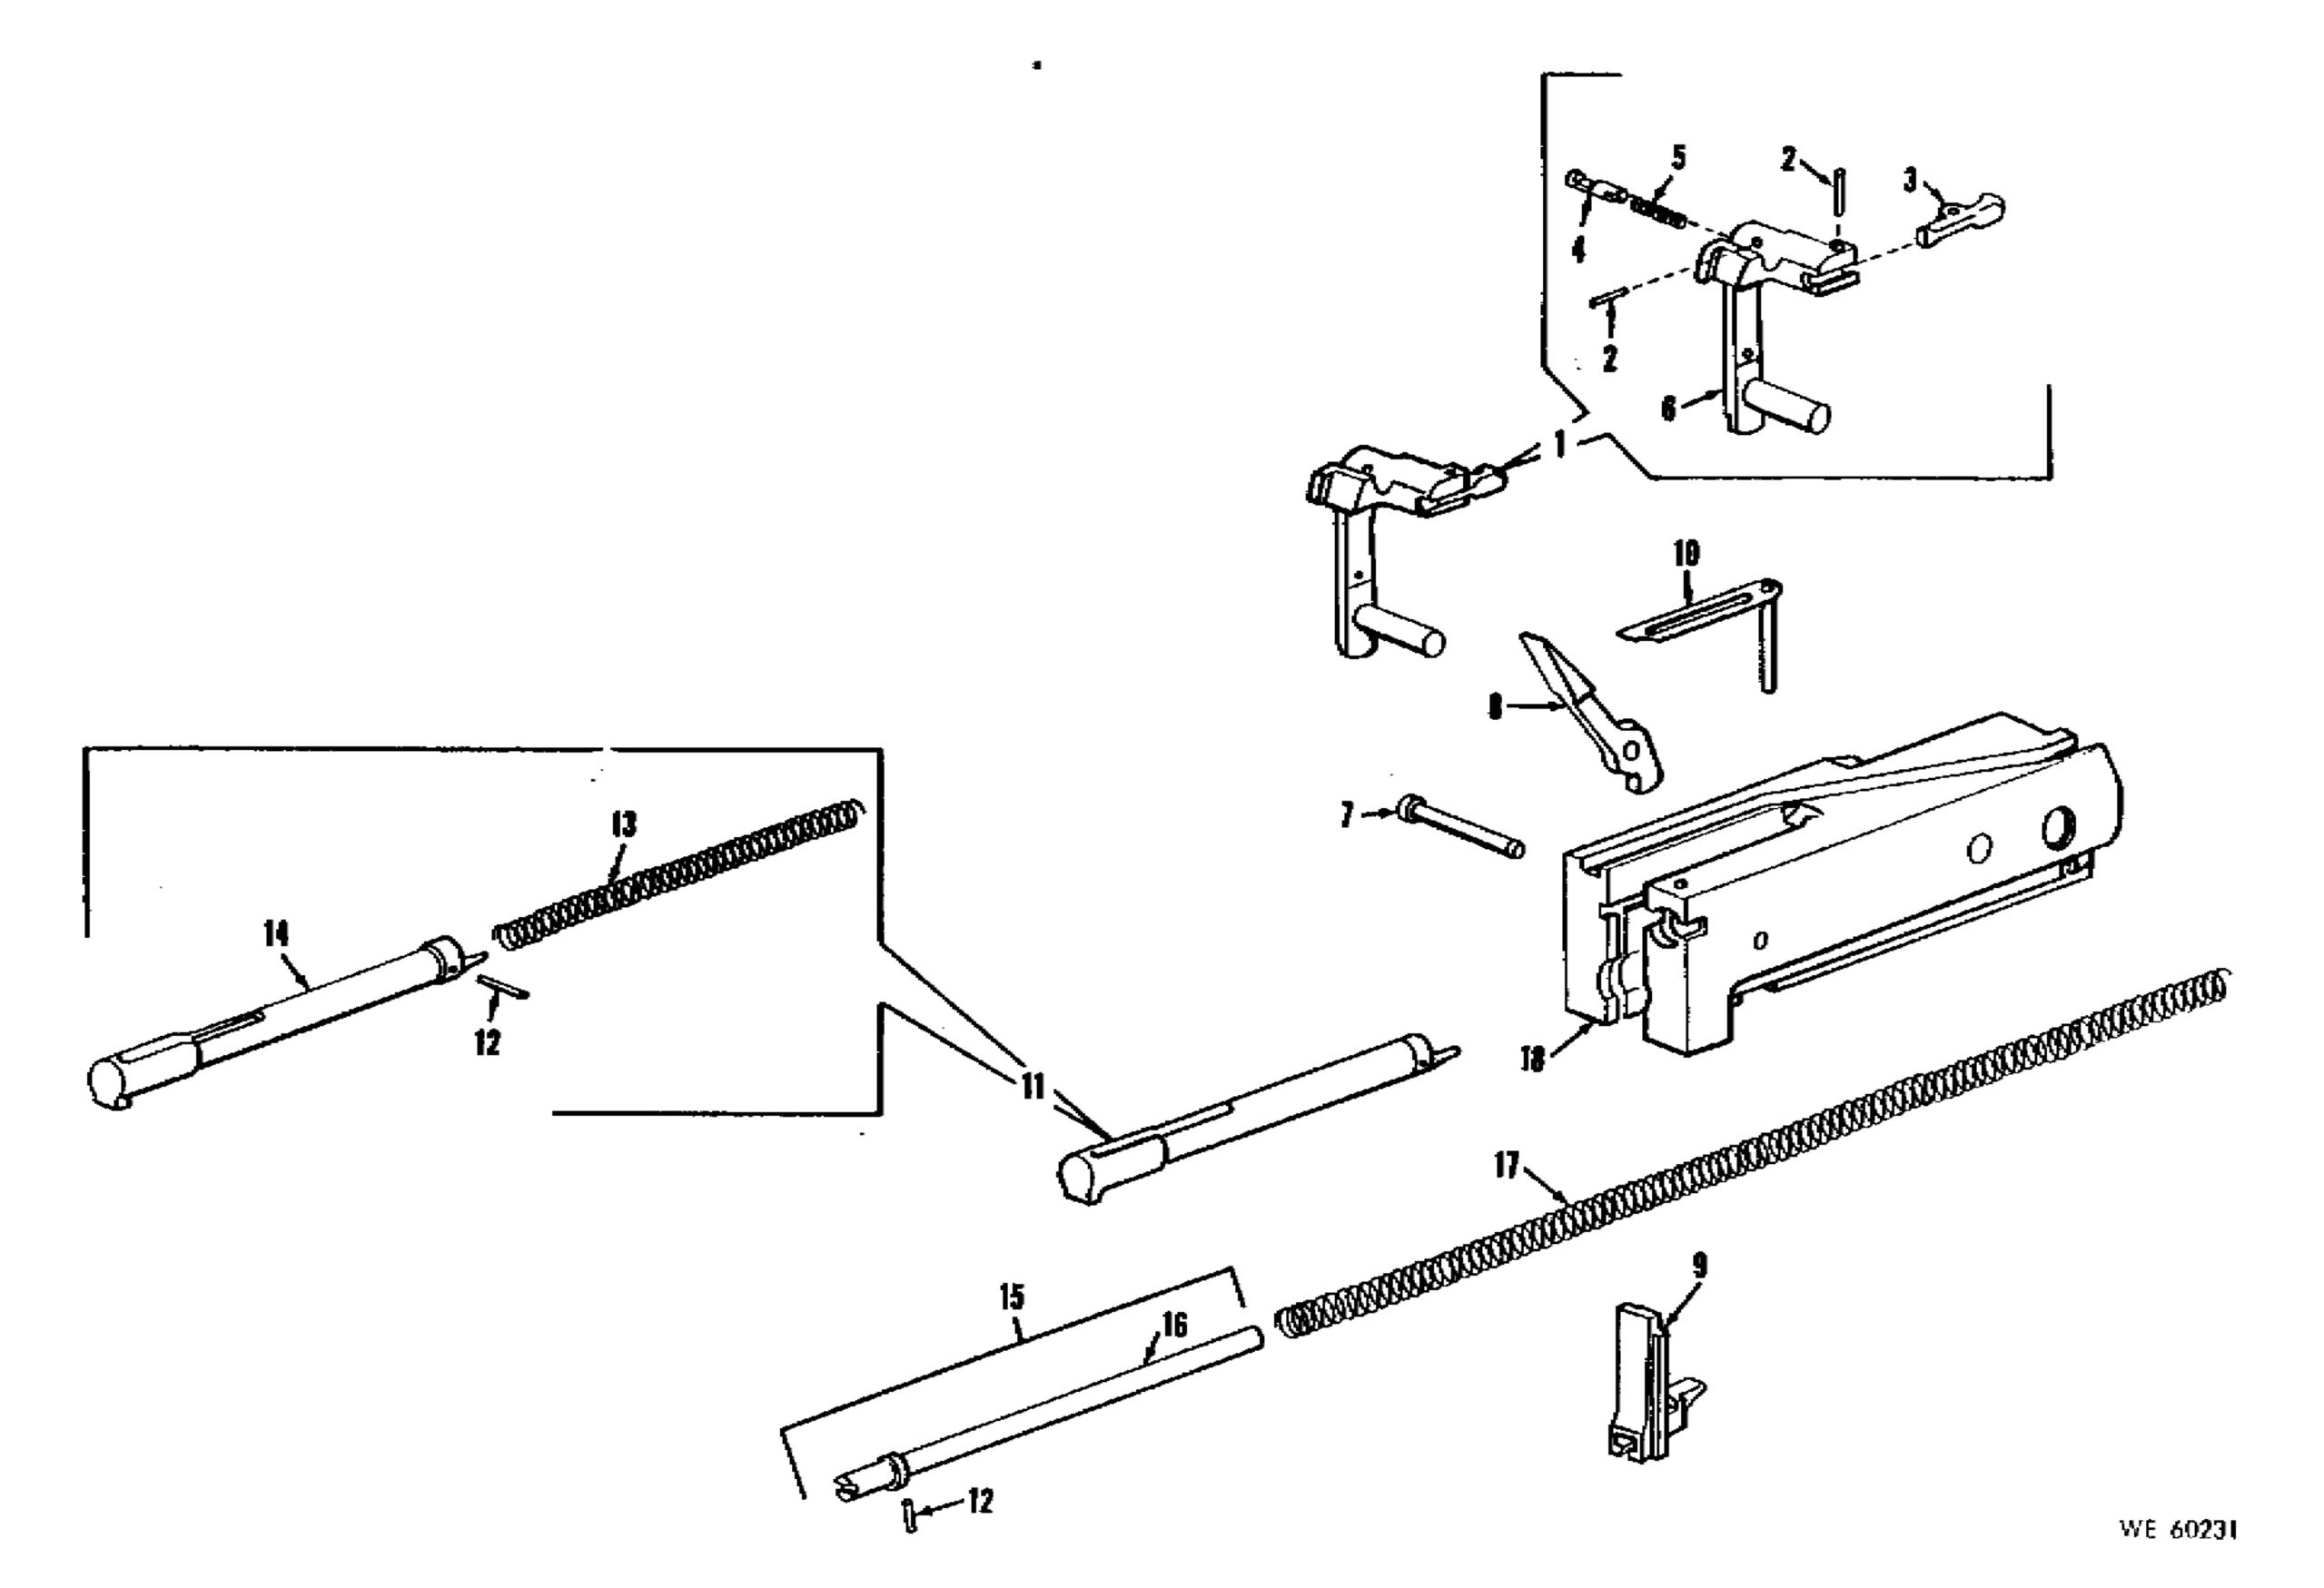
Bolt group for Caliber .30 Machine Guns, M1919A4 and M1919A6 only—exploded view.
